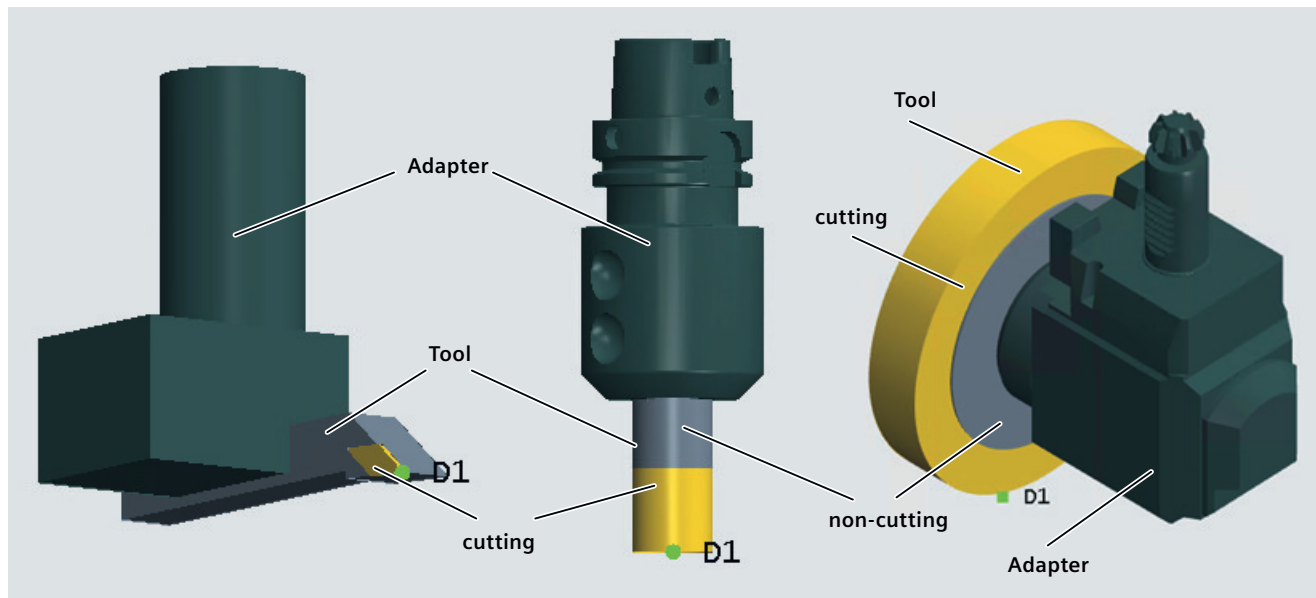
Example: Adapter and tool components for turning, milling/drilling and grinding tools
